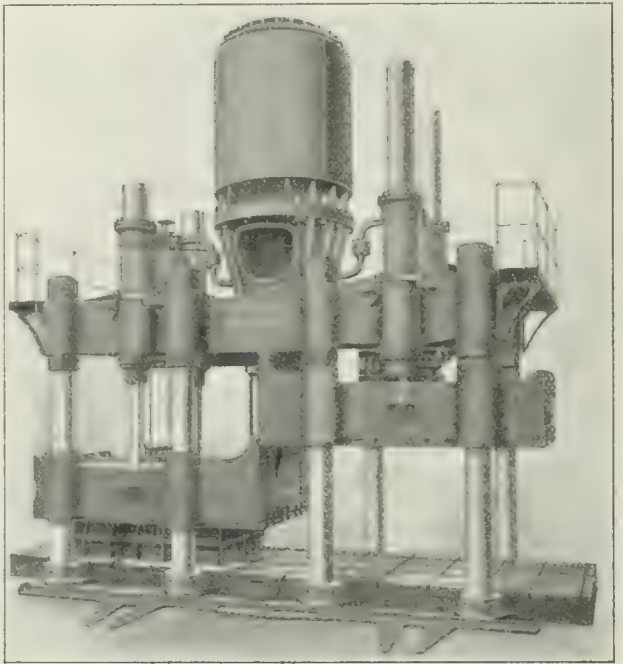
The Steam Hydraulic Bending Press with Two Crossheads.
